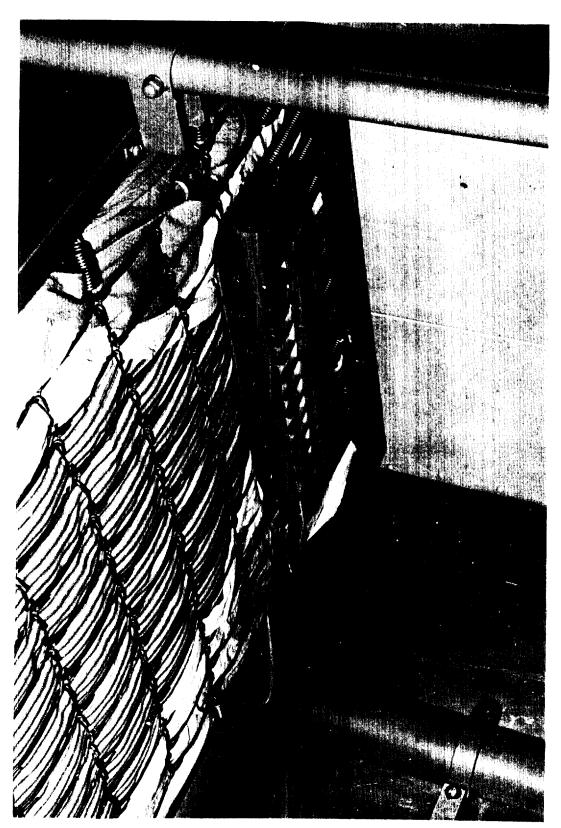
Typical installation of berth light, symbol 231, in spring type berths. (For details see method B-1-A of appendix B).
